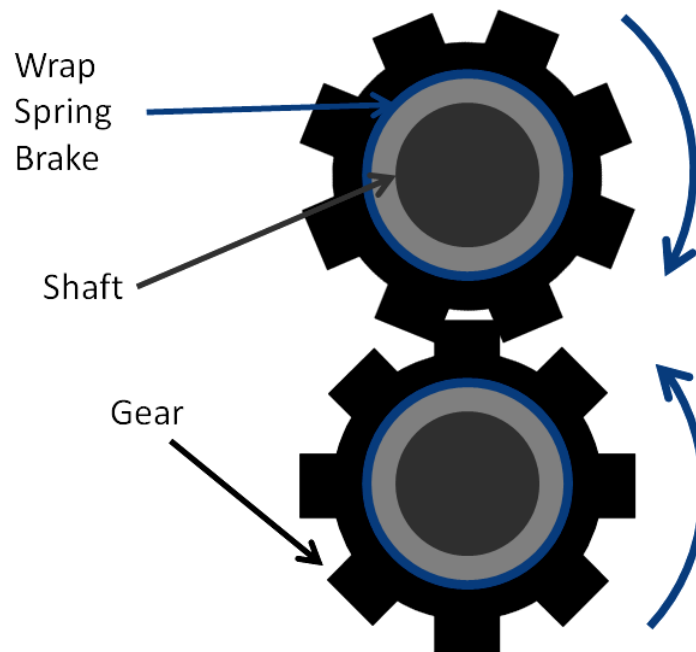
Hip braking concept. The top input gear causes the rotation of the bottom gear to reverse, creating two shafts rotating in opposite directions that can now be locked in both directions by two identical wrap springs.
